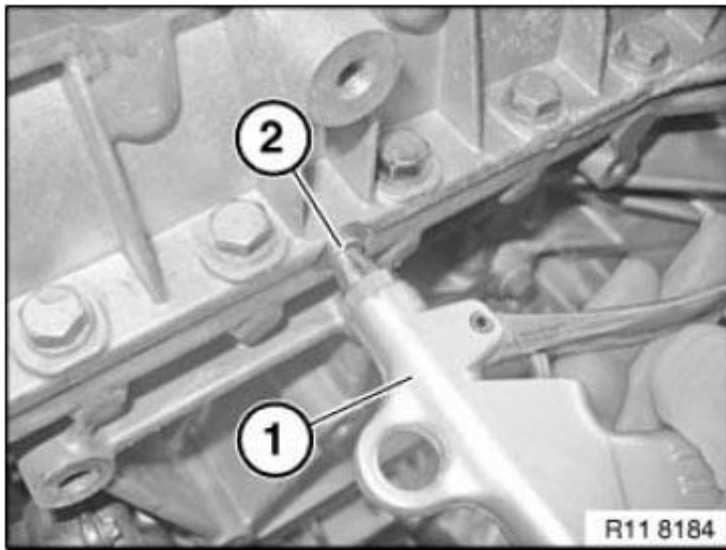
Blowing Compressed Air Into Injector Nozzle
